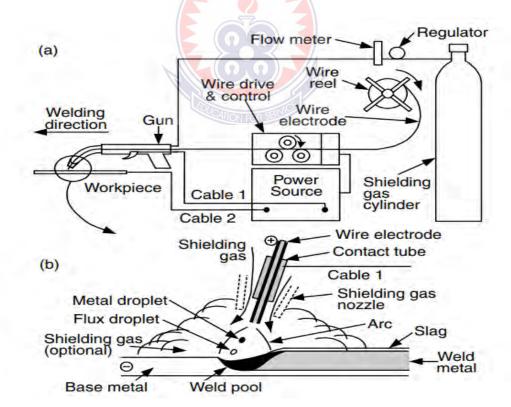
Flux-core arc welding: (a) overall process; (b) welding area enlarged.
